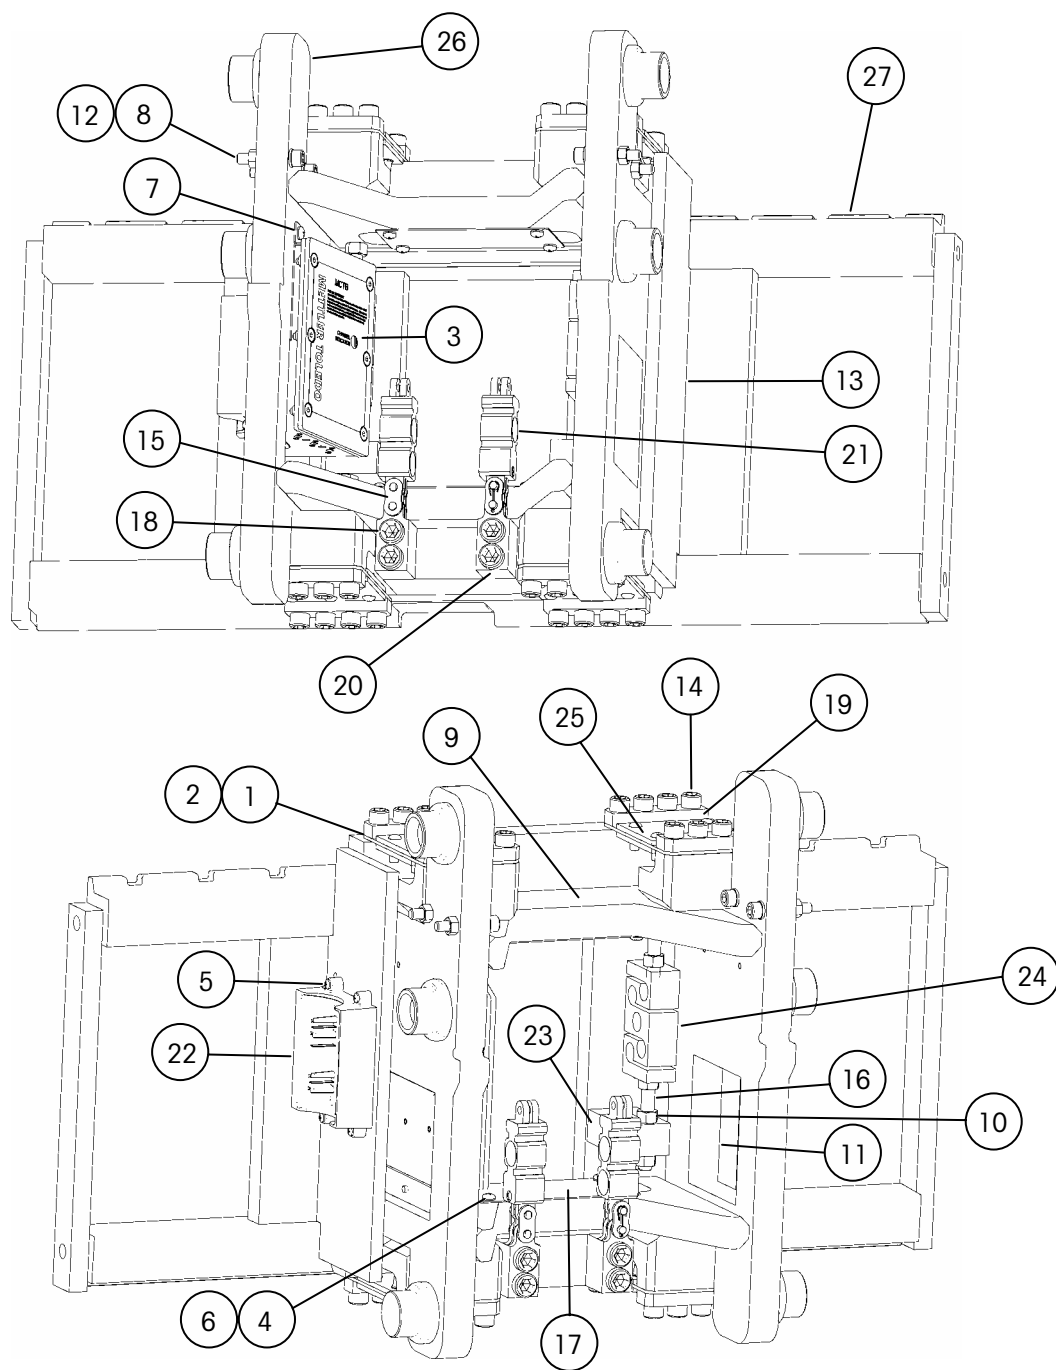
Forklift Scale Carriage Assembly (Triplex Version)
